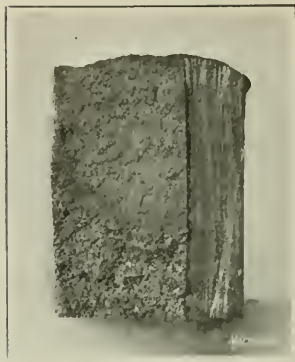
Part of Cast-iron Section showing Characteristics of the Weld and the Original Metal
